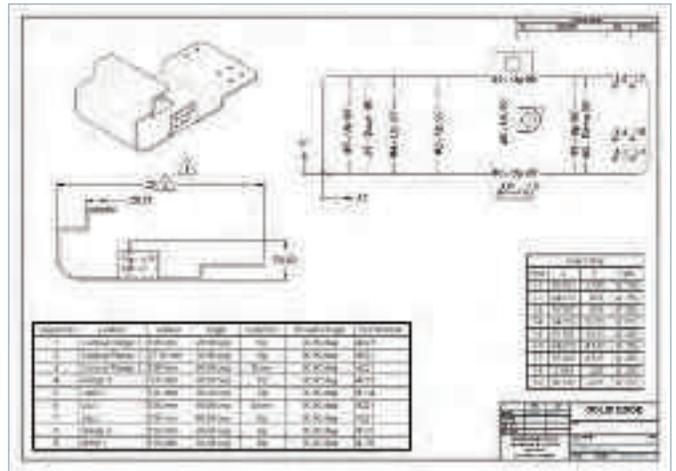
Solid Edge can produce sheet metal drawings complete with folded and flat views. A bending sequence table and a hole table take the risk out of part manufacturing. Bend lines on the folded view can include bend information such as sequence number, direction and angle.
